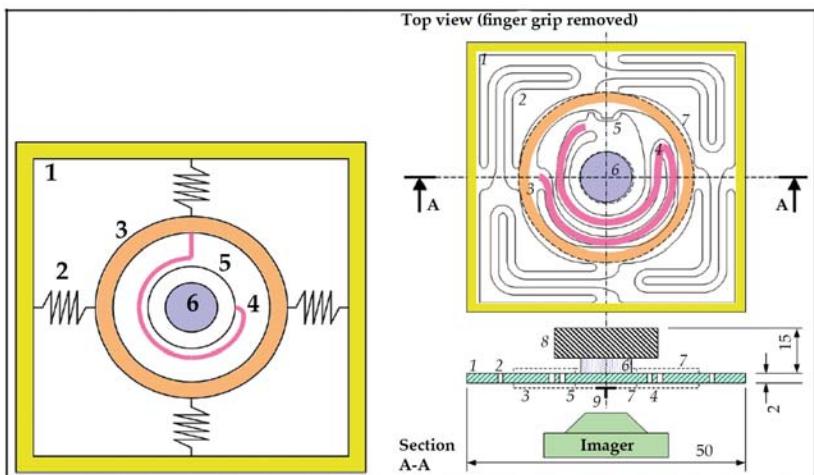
(Left) Abstract model of planar translational-torsion spring mechanism. (Right) Realised design of spring mechanism. 1: outer frame (yellow); 2: outer springs; 3: inner frame (apricot); 4: inner torsion spring (pink); 5: grip mount; 6: grip shaft (light blue); 7: restraining plates; 8: finger grip; 9: index points. Adapted from (Eng 2007).
